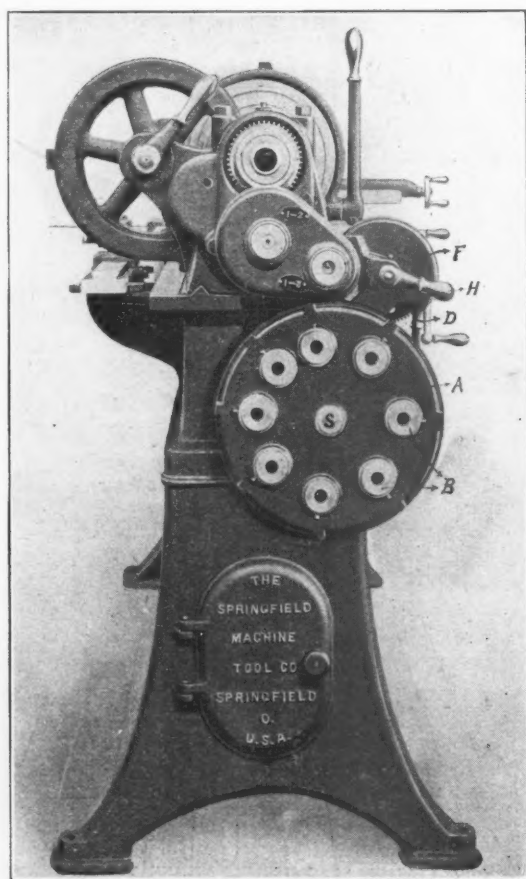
END VIEW OF IDEAL LATHE. SHOWING METHOD OF SUPPORTING CHANGE GEARS BY THEIR HUBS.
